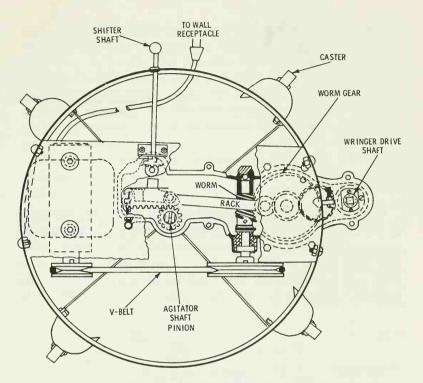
The bottom view of a typical washing machine, with its gear-case assembly.
